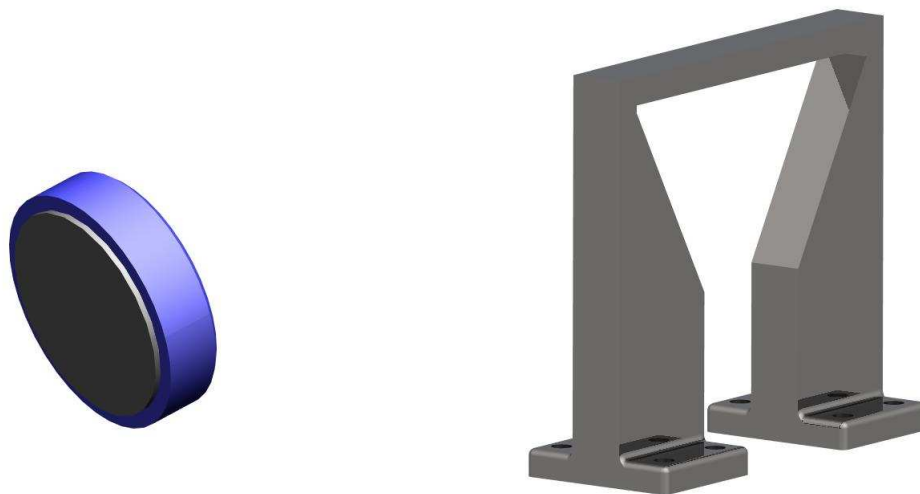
Design of the bearing (left) and bearing holder (right).
